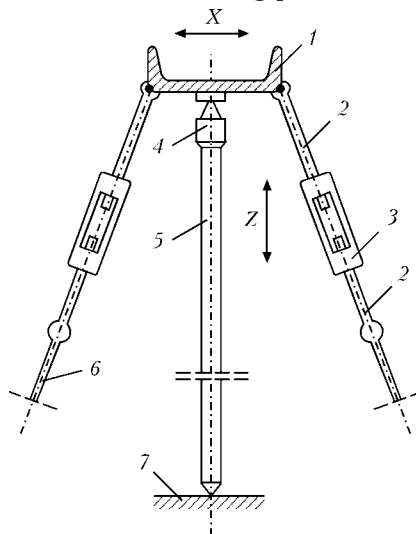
Console support scheme: 1 – console; 2 – adjustment screws; 3 – adjustment nuts; 4 – bearing nut; 5 – support; 6 – tightening; 7 – machine frame support
